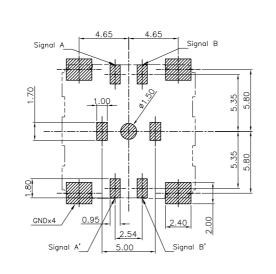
Recommended PCB Layout (mm ±0.05) & Circuit Diagram
